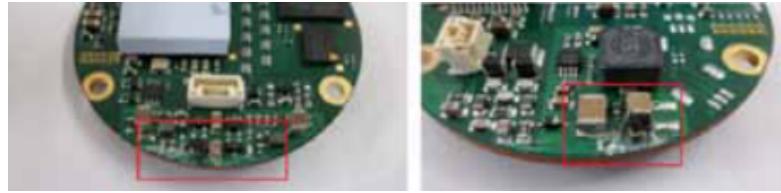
Water penetration damage in an optical encoder PCB [65]
